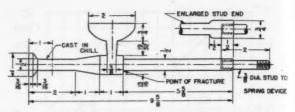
Detailed drawing of hot tear casting with straight stud-end adopted as standard for the test. The enlarged stud-end shown above was used in the first tests made with the casting.
